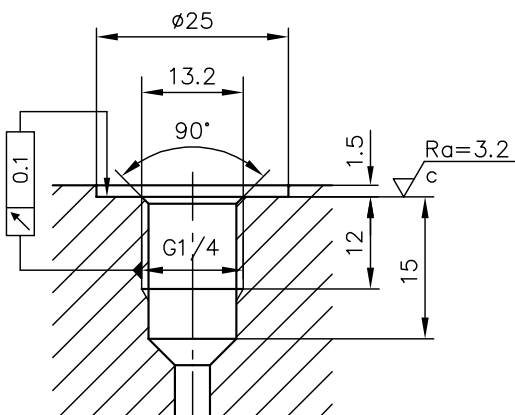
Screw-in thread DIN 3852-X-G 1/4
